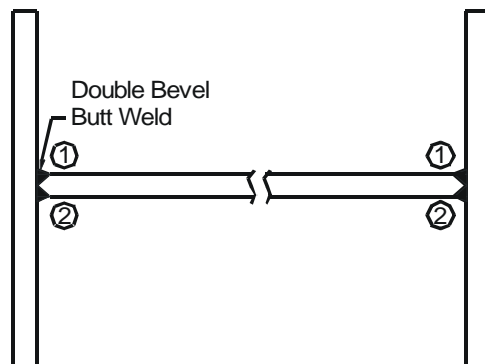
Application of Double Head Welding in girders laid flat
